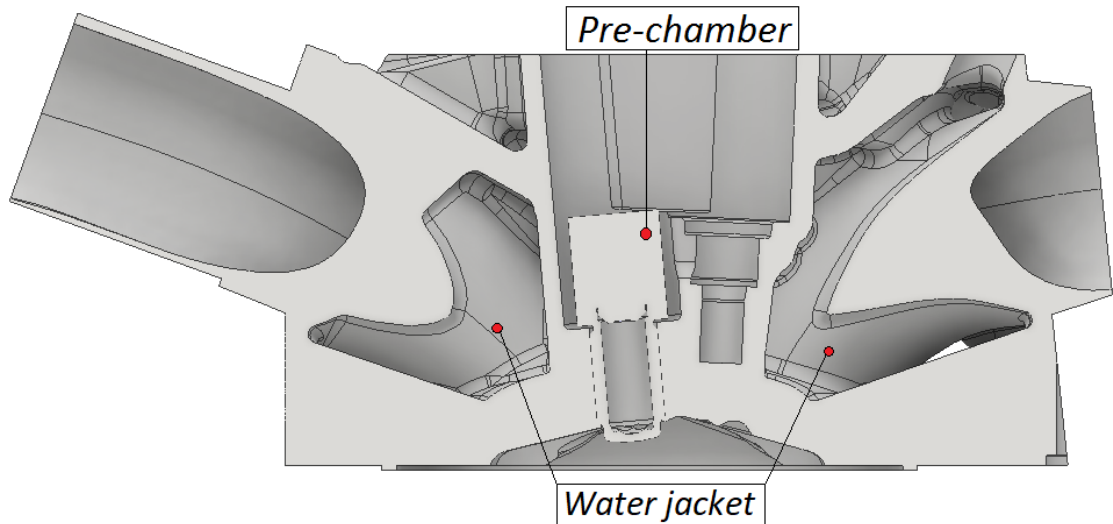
Section view of cylinder head geometry for the heat transfer analysis.
